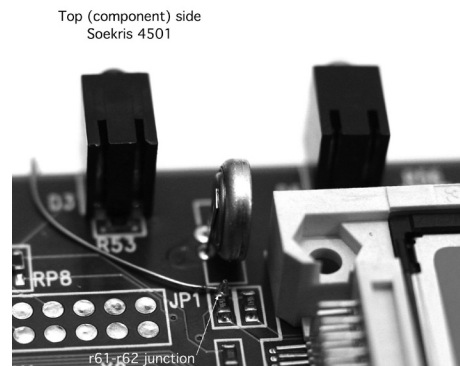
WIRING ON TOP (COMPONENT) SIDE OF 4501 PCB
